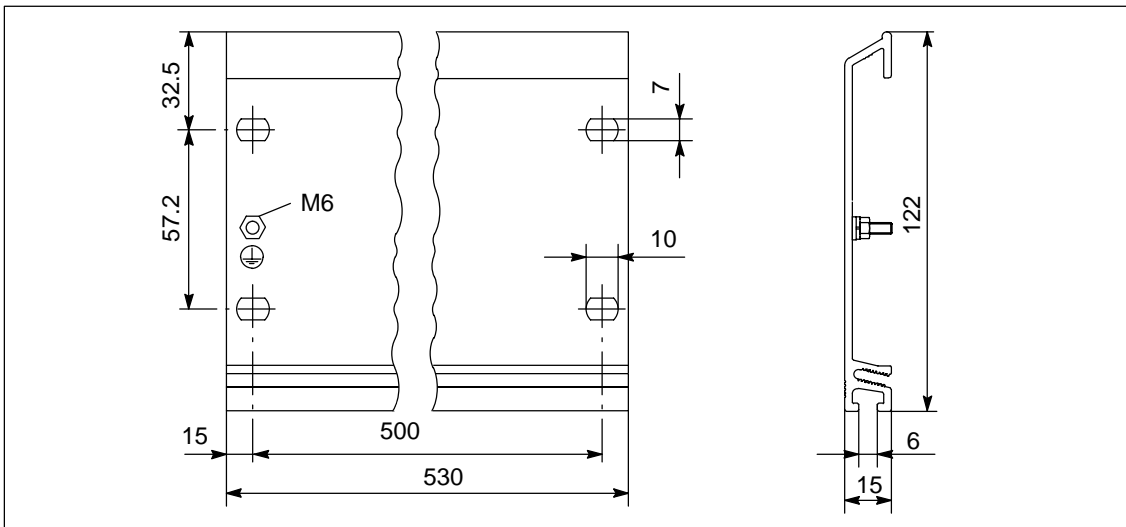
Dimension Drawing of the Rail with 530 mm Standard Width
